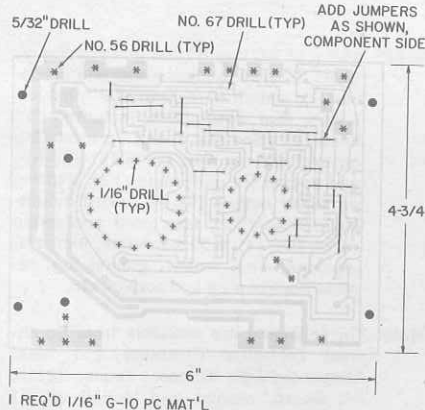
PC BOARD MECHANICAL DETAILS. Drill as indicated then install the jumpers.
